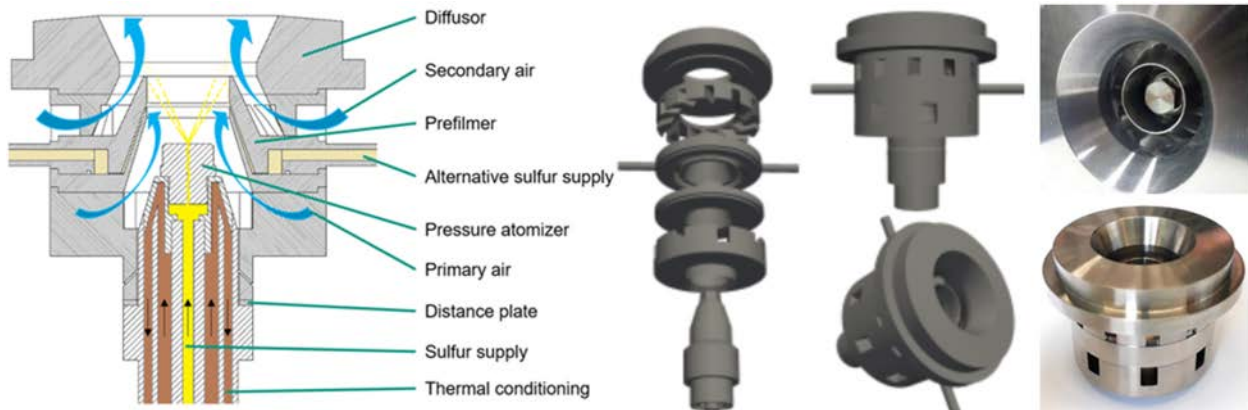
(Left) Cross section view and (right) exploded view of the burner nozzle developed for combustion of sulfur.
